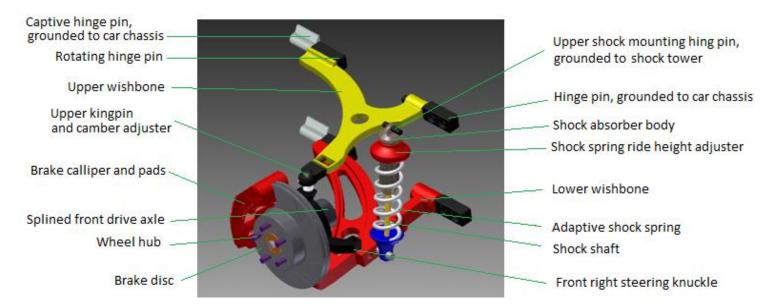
CAD image of complete suspension assembly without wheel and tyre.
